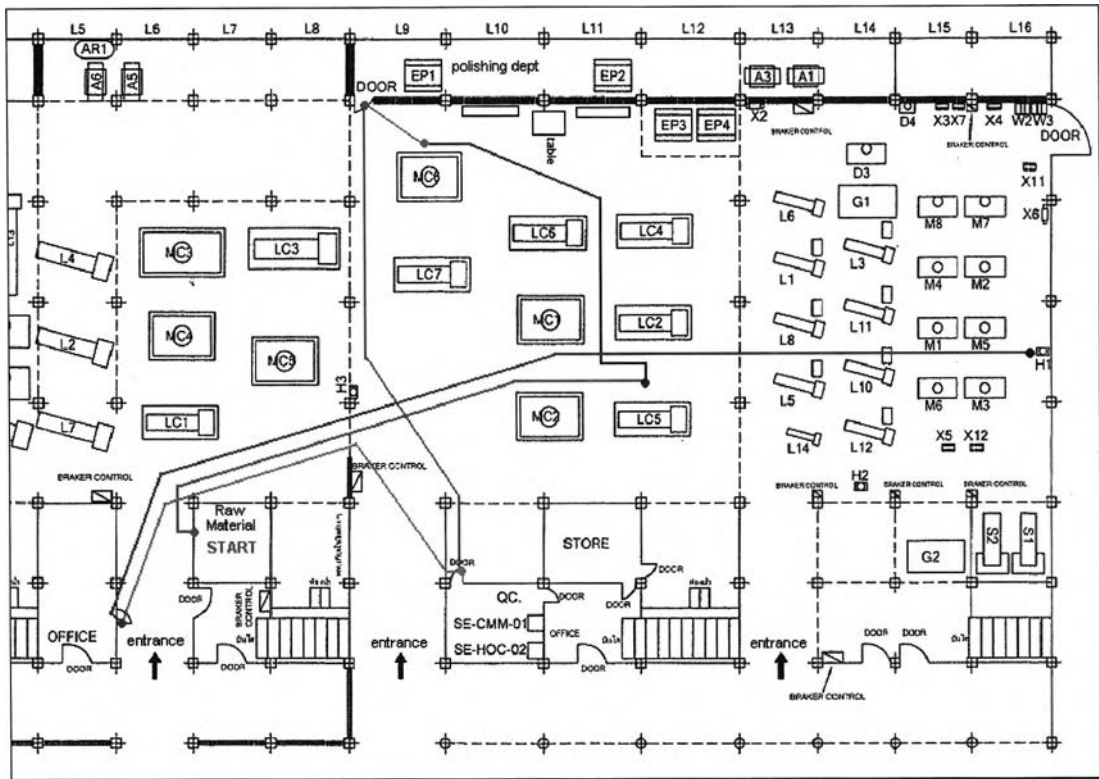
B – Poly screw string diagram (part 2 of 3, Screw U head) for the original design
